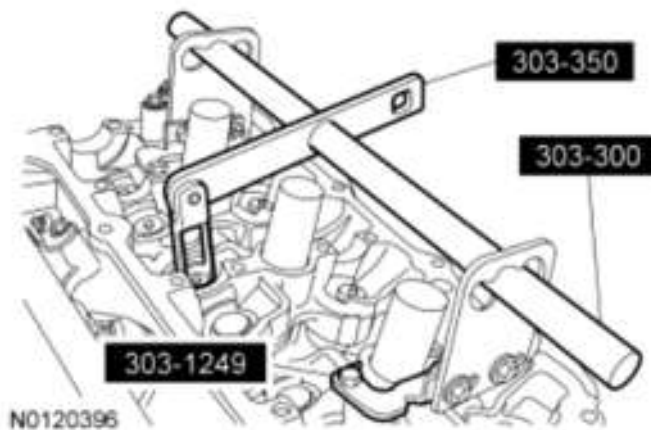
Installing Keys, Retainer And Spring Using Valve Spring Compressors
